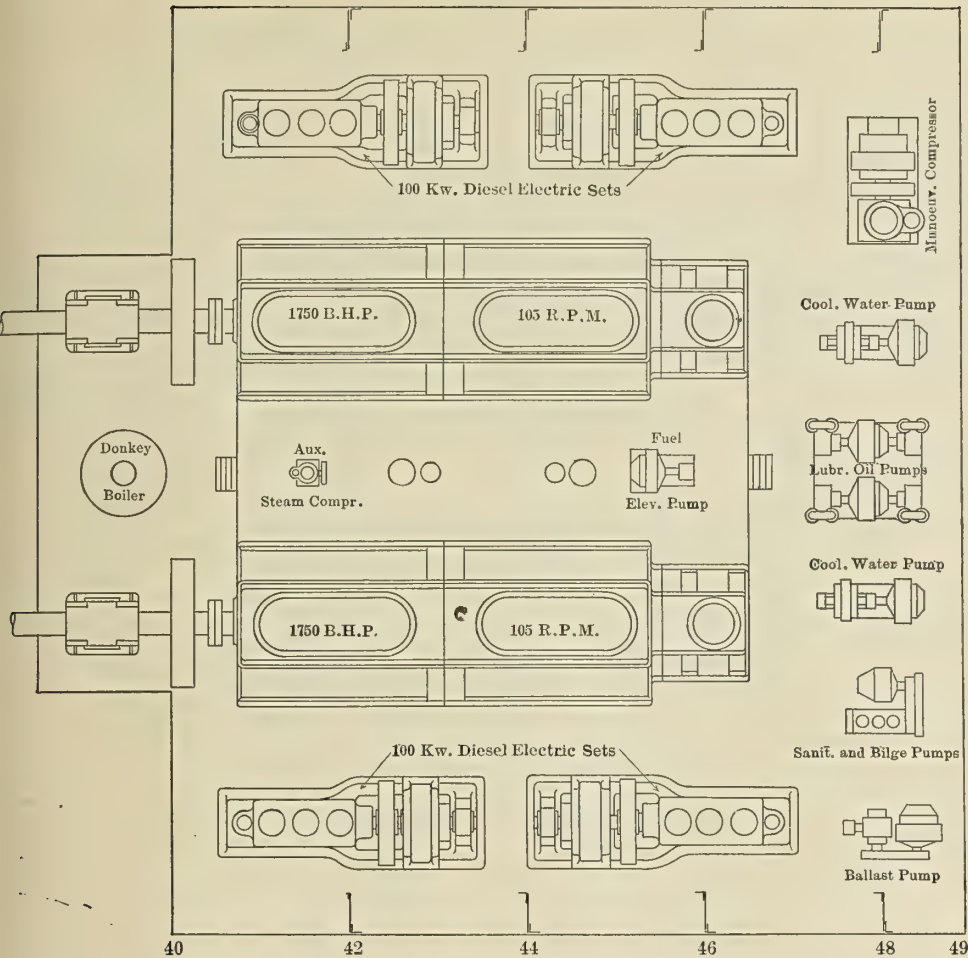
Section Through Engine Room of 9,600-Ton Motorship
